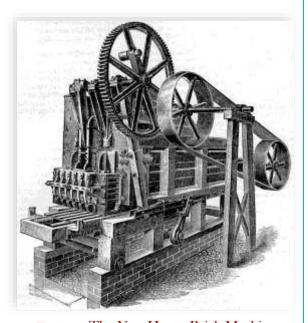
The New Haven Brick Machine The bottom planks and side planks are removable. The rear end is a heavily ribbed casting, weighing 780 lbs., and is strong enough to stand any amount of back pressure that may be exerted at this point by the temperingshaft. 72
